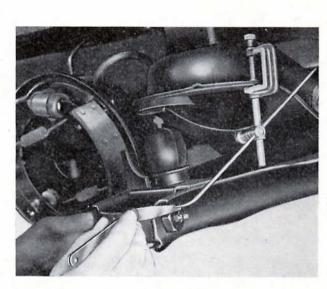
Checking the lower arm for slackness on the fulcrum shaft
